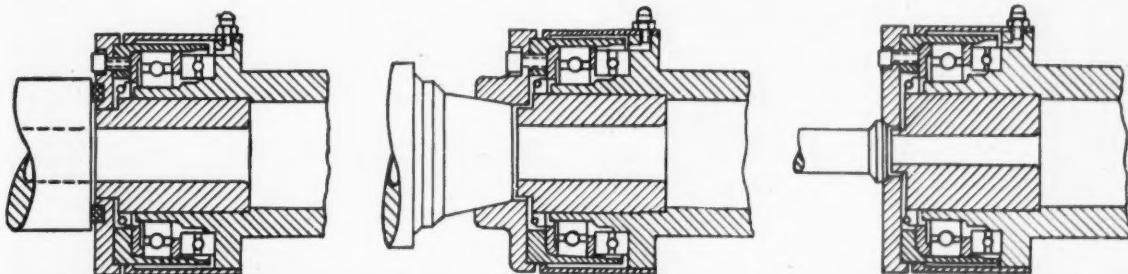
Three methods of workpiece-to-pressure head seal used on V.D.F. machines. (Left) Conventional type of rubber-to-metal seal. (Centre) The preferred type of slow-taper metal-to-metal seal. (Right) Acute angle profile seal to suit component design. It is doubtful whether this type of seal is entirely satisfactory
